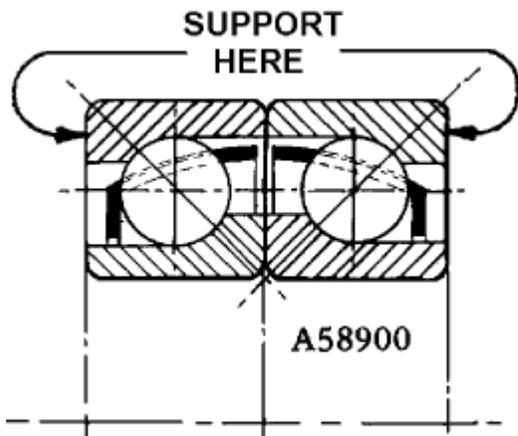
ANGULAR CONTACT BEARING ASSEMBLY
